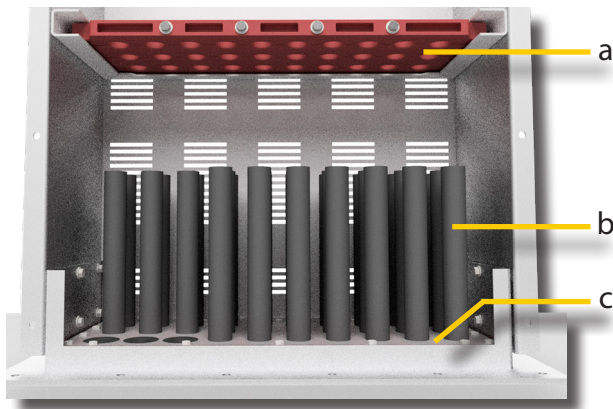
Horizontally Positioned Vapor Barrier Assembly
